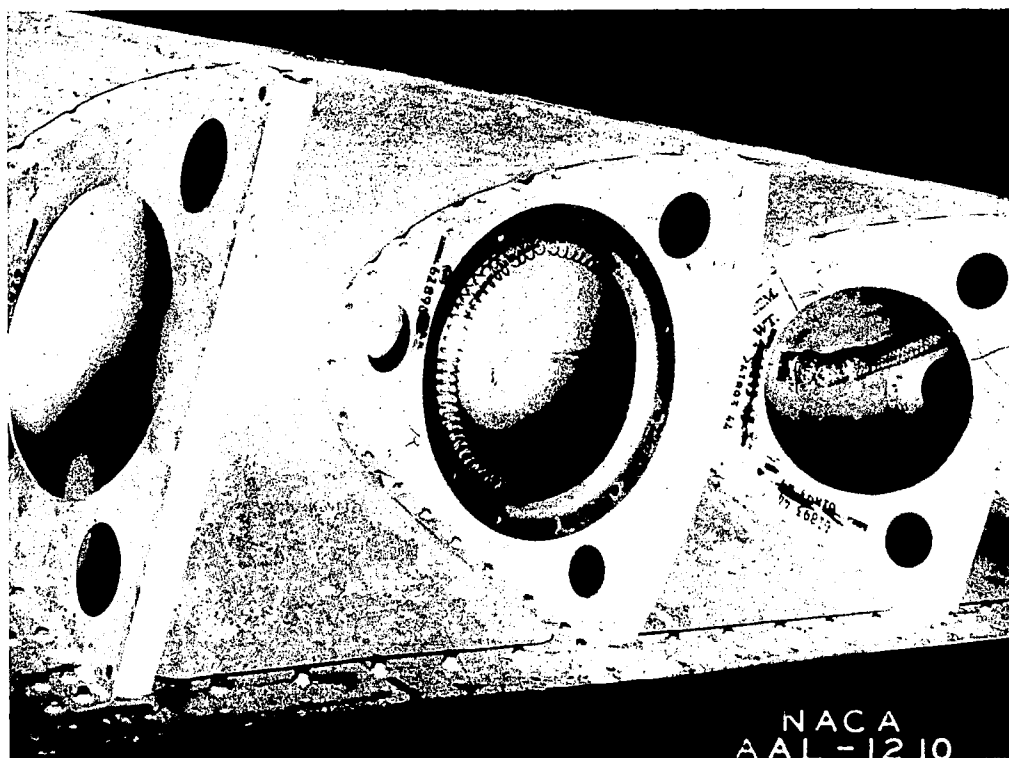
An interior view of the tip end of the wing leading edge, the exhaust tube removed, showing the clip type support for the tube employed at the tip rib stations where restraint was provided.
